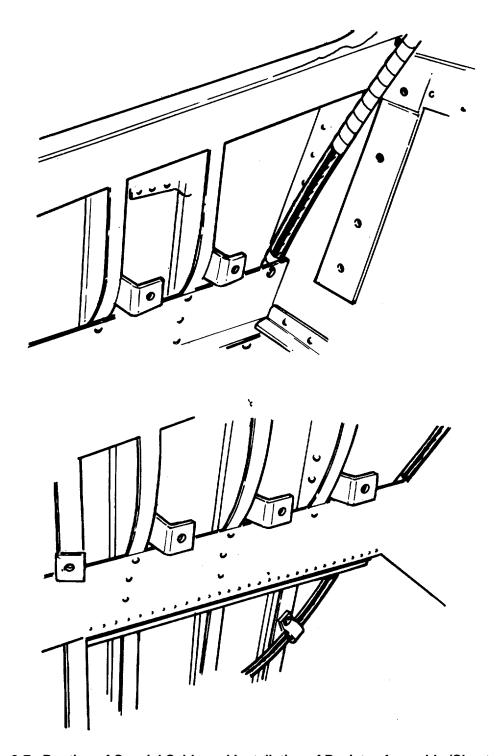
Routing of Coaxial Cable and Installation of Resistor Assembly (Sheet 2 of 3).
